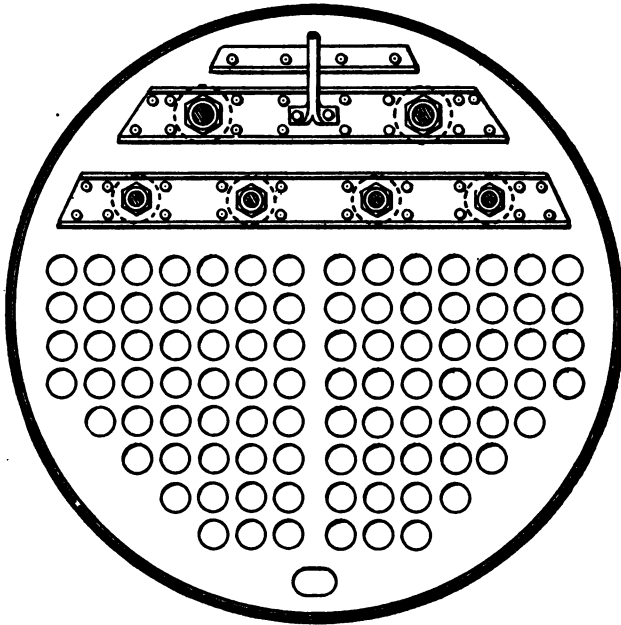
A BOILER HEAD WITH THROUGH BRACES.
